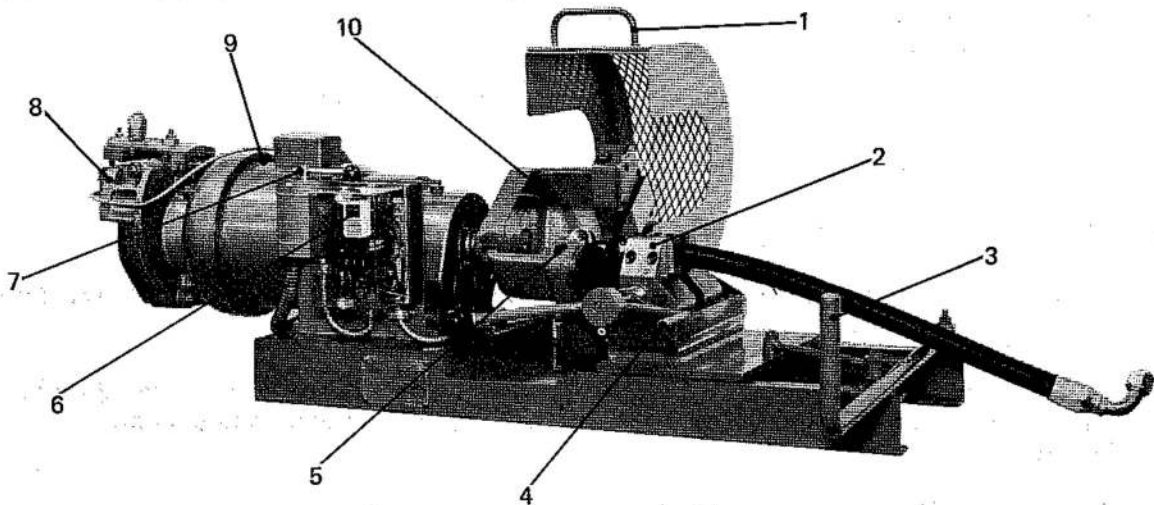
Hose fitting assembly machine, RPD 1045B-10
